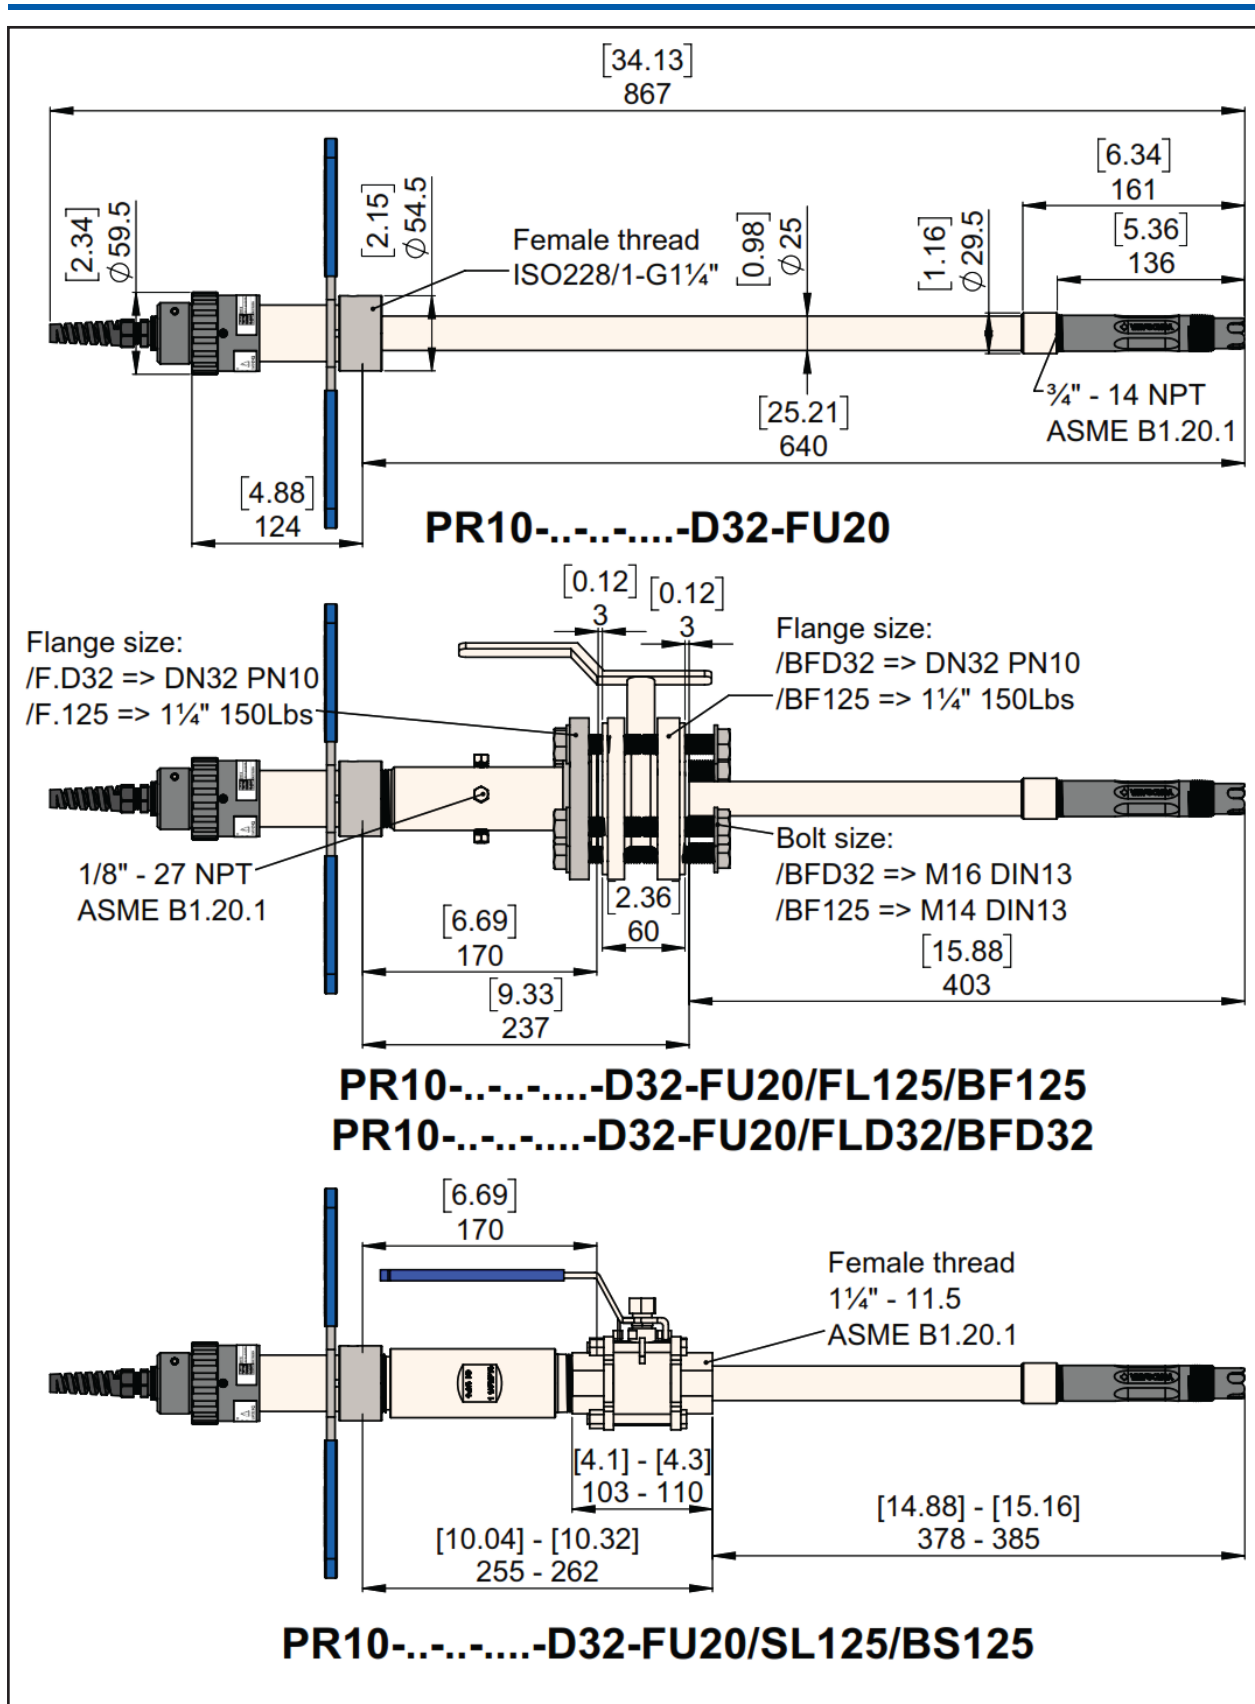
Dimensional drawing PR10...-D32 with mounted FU20 sensor - units in mm [inch]
